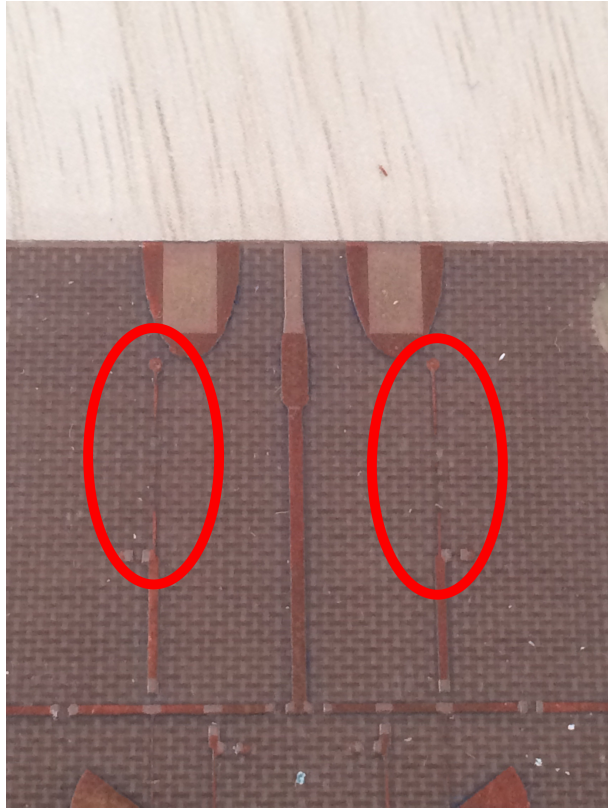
Top view photograph of the switch circuit without solder mask with removed microstrip tracks circled in red due to the manufactured process. Source: Own elaboration.
